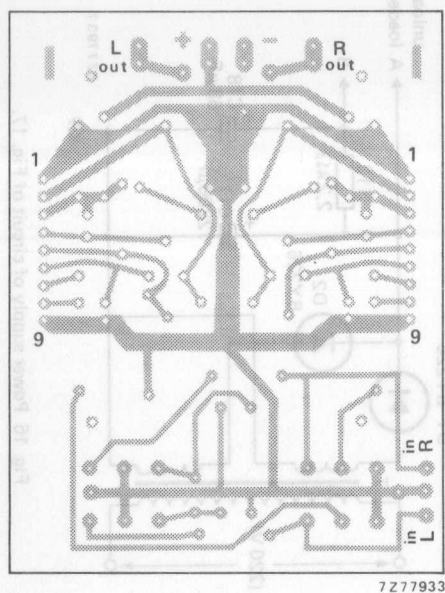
Track side of printed-circuit board used for the circuit of Fig. 12; p.c. board dimensions 83 mm x 65 mm.
